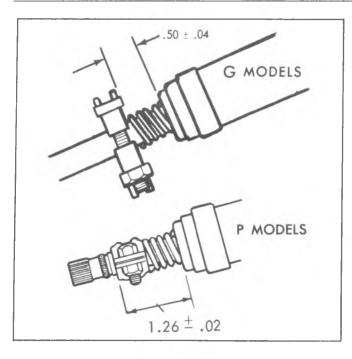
B-32--Steering Column Lower Bearing Adjustment
